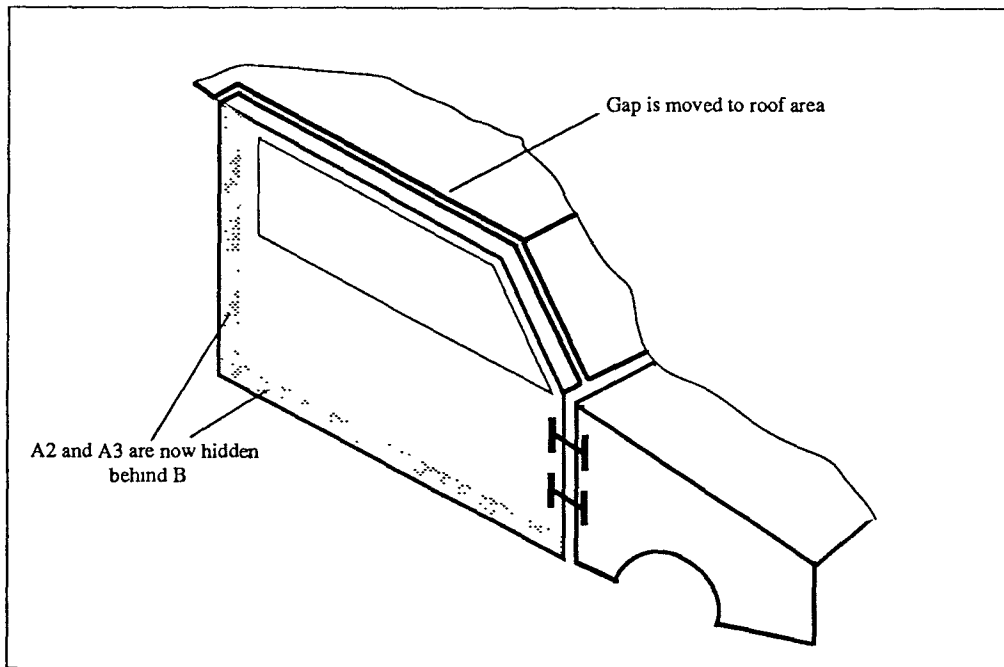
B. Modified Design of a Car Door Assembly With Improved QM
